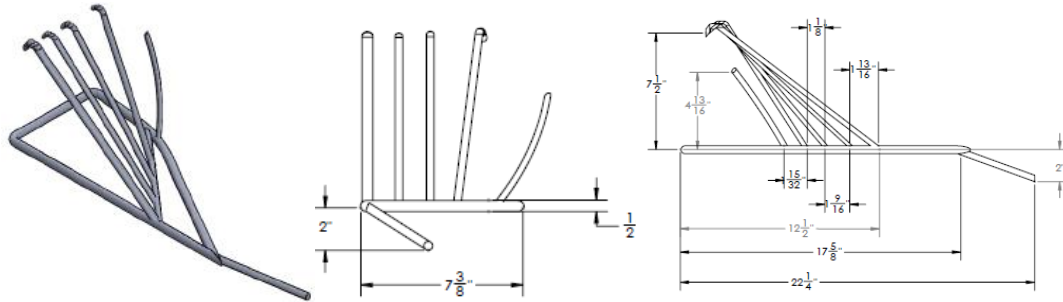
Guide-vane (left), front (center) and side view (right) schematic (all the dimensions in inches)
